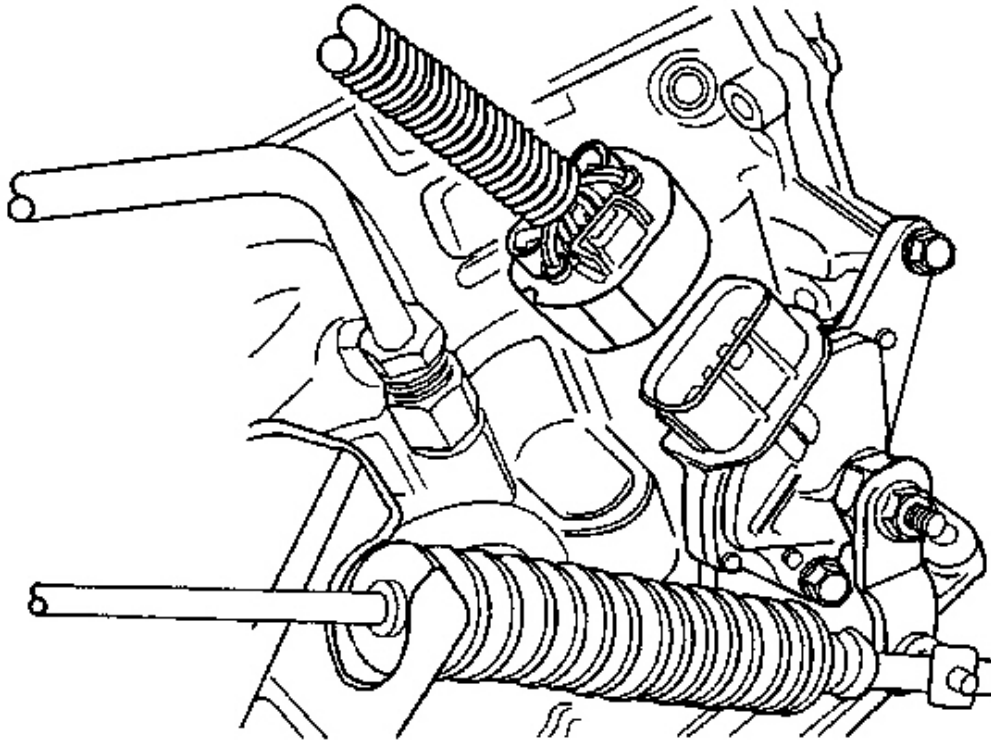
PNP Switch Electrical Connector & Wiring Harness
